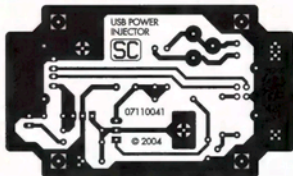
check your PC board carefully against this full-size etching pattern before installing any of the parts.
